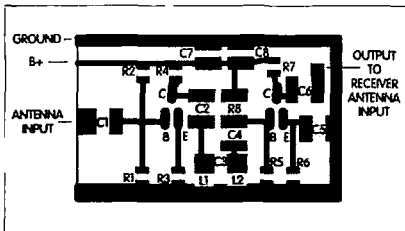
The part tabs and wiring layout on a 1-1/4 x 2-inch PC board.
